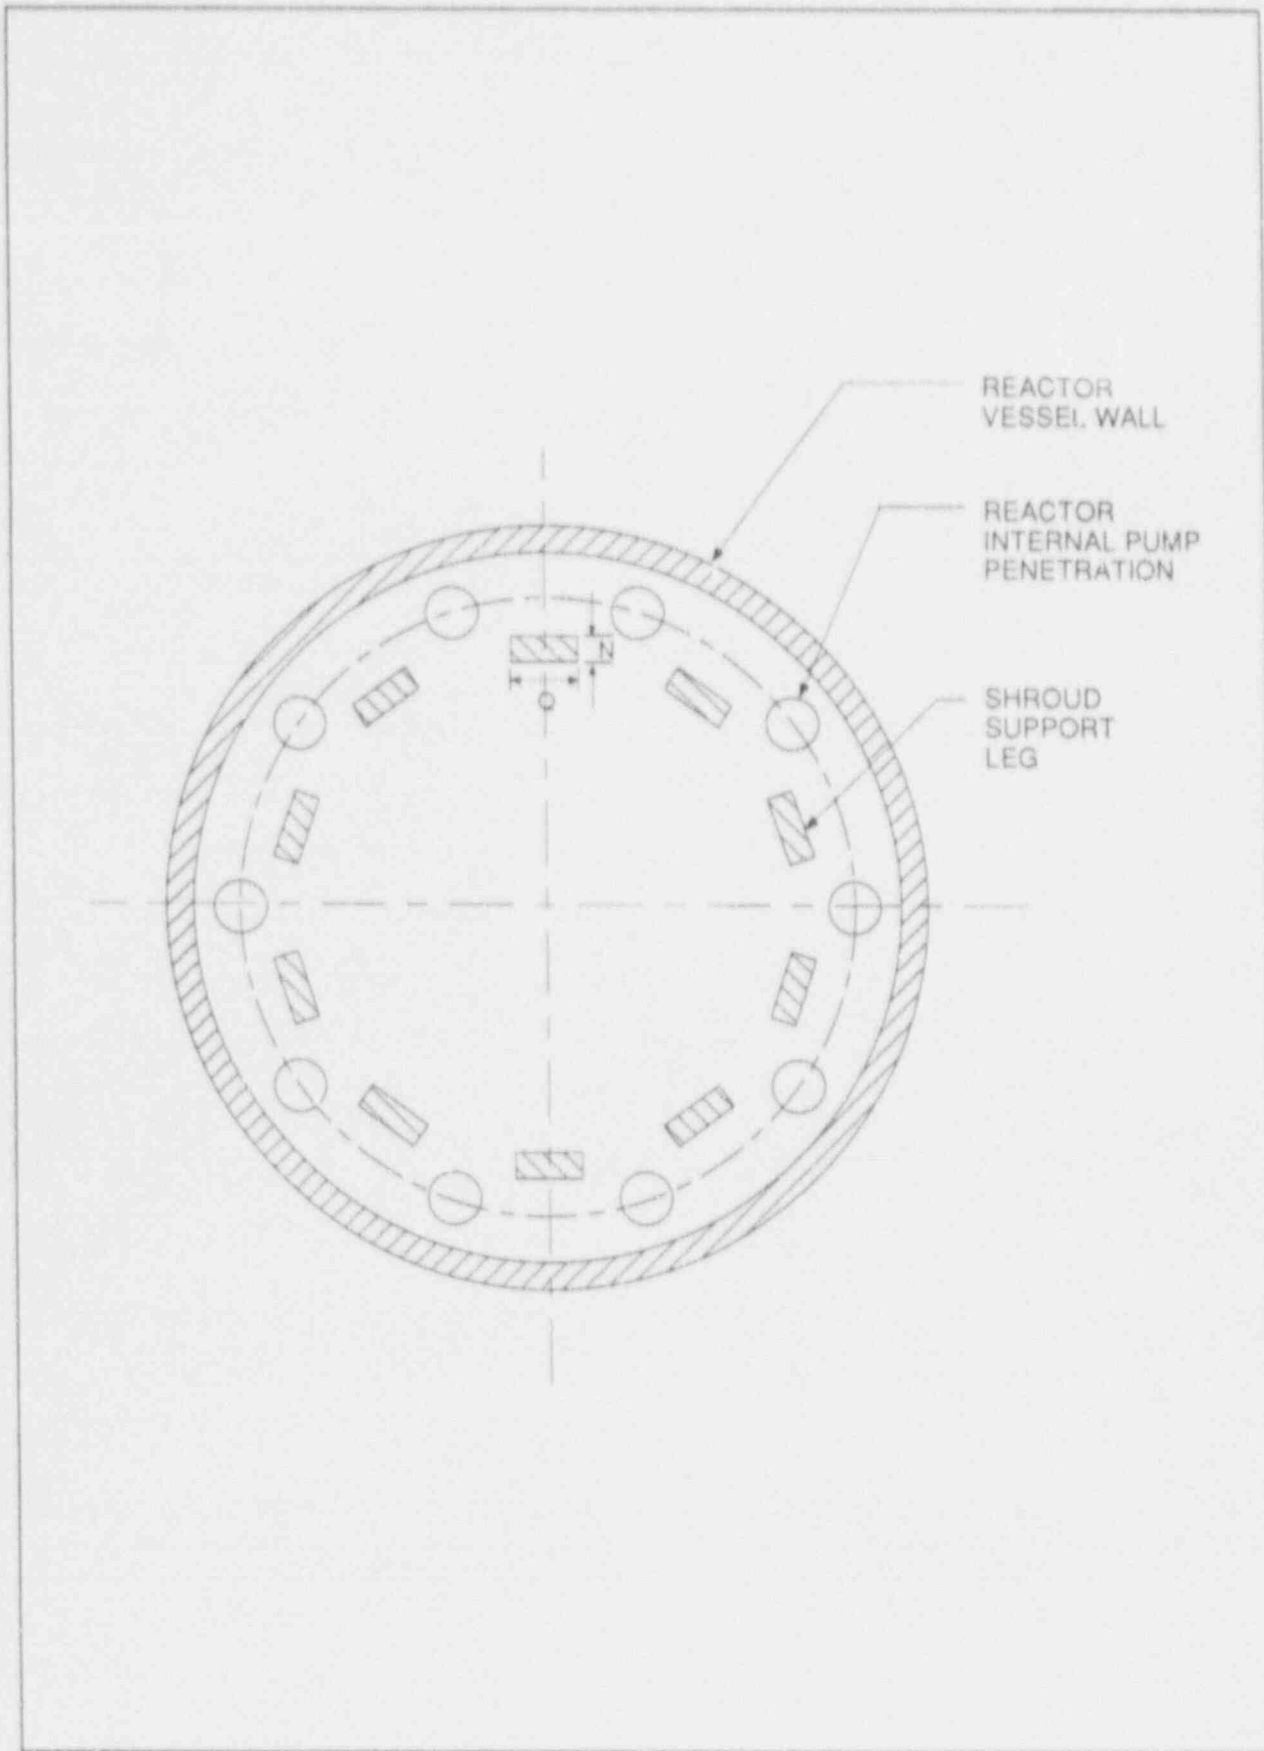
Pump and Shroud Support Leg Arrangement
